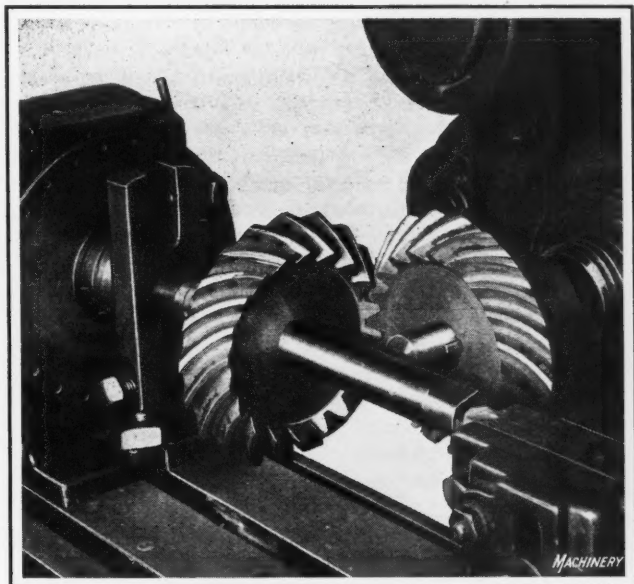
Pair of Miter Gears of the Extended Involute Type mounted in a Milling Machine for testing
